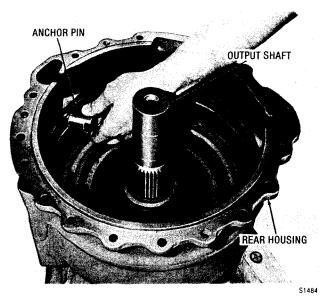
Installing clutch anchor pin (TRT-3 overdrive)
